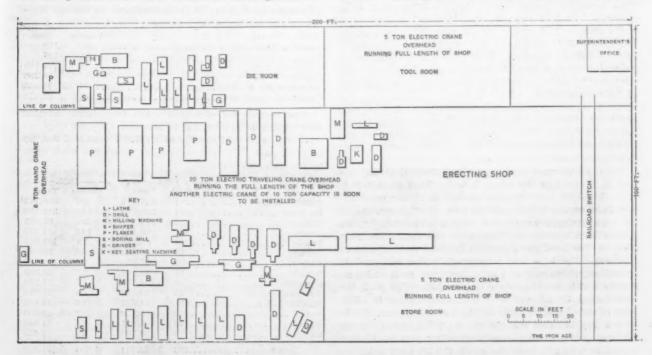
Plan of the Machine Shop, Showing the Layout of the Equipment.
